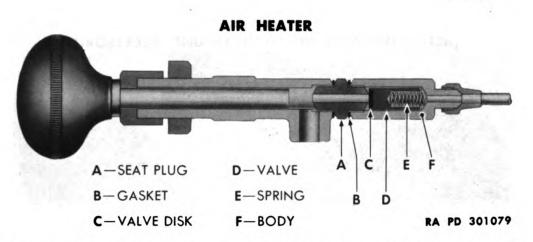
Air Heater Pump Check Valve Assembly (No. 048604)
